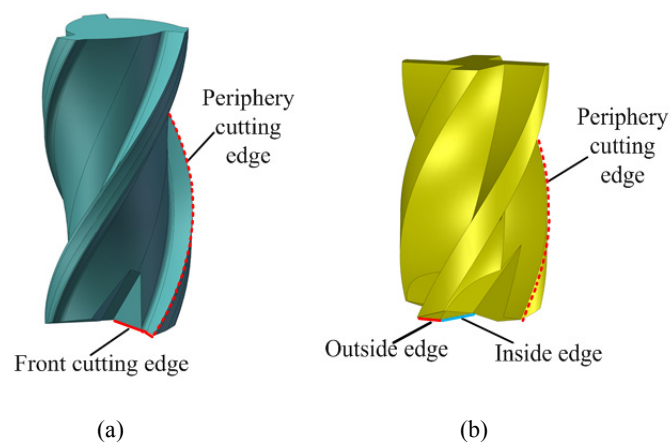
Structure of two different helical milling tools: a conventional end mill b helical milling specialized tool
